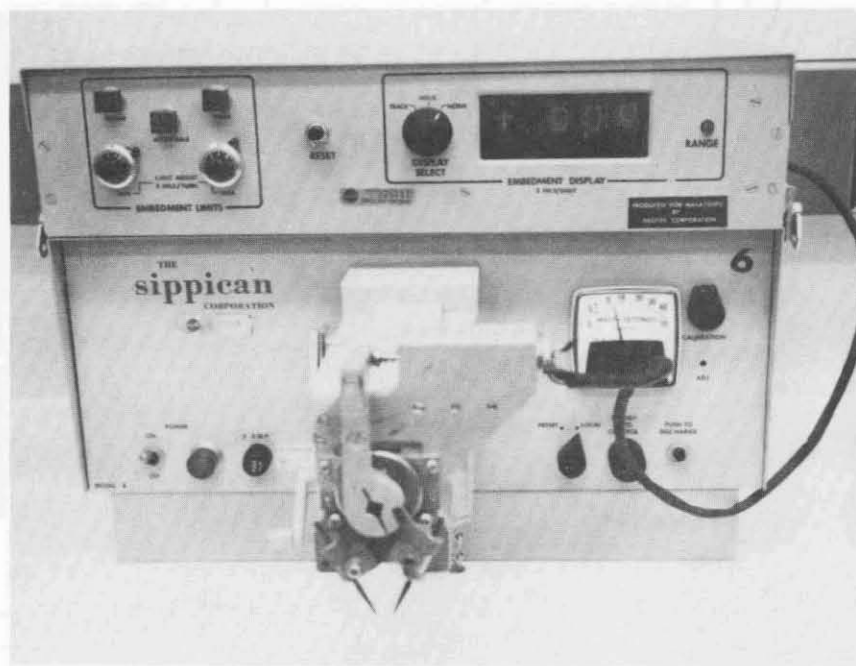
Detail of Mounting Arrangement of GSFC - Weld Quality Monitor LMT Embedment Sensor
